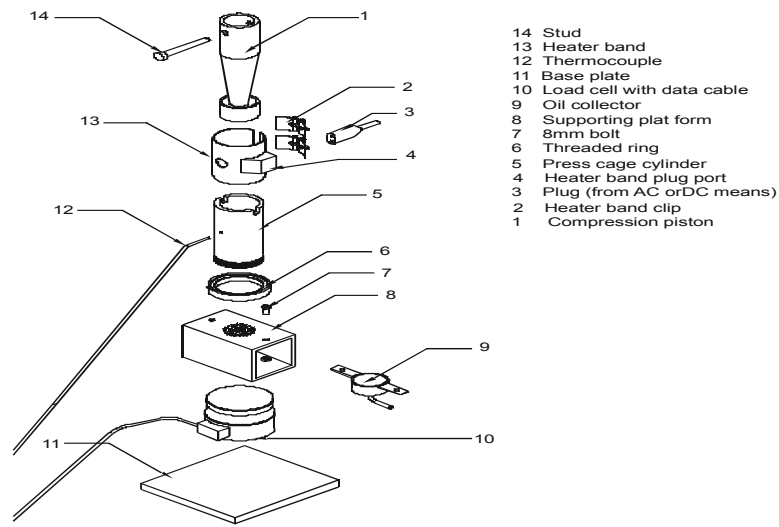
Exploded view of the Model laboratory Mechanical Oil Expression Rig
